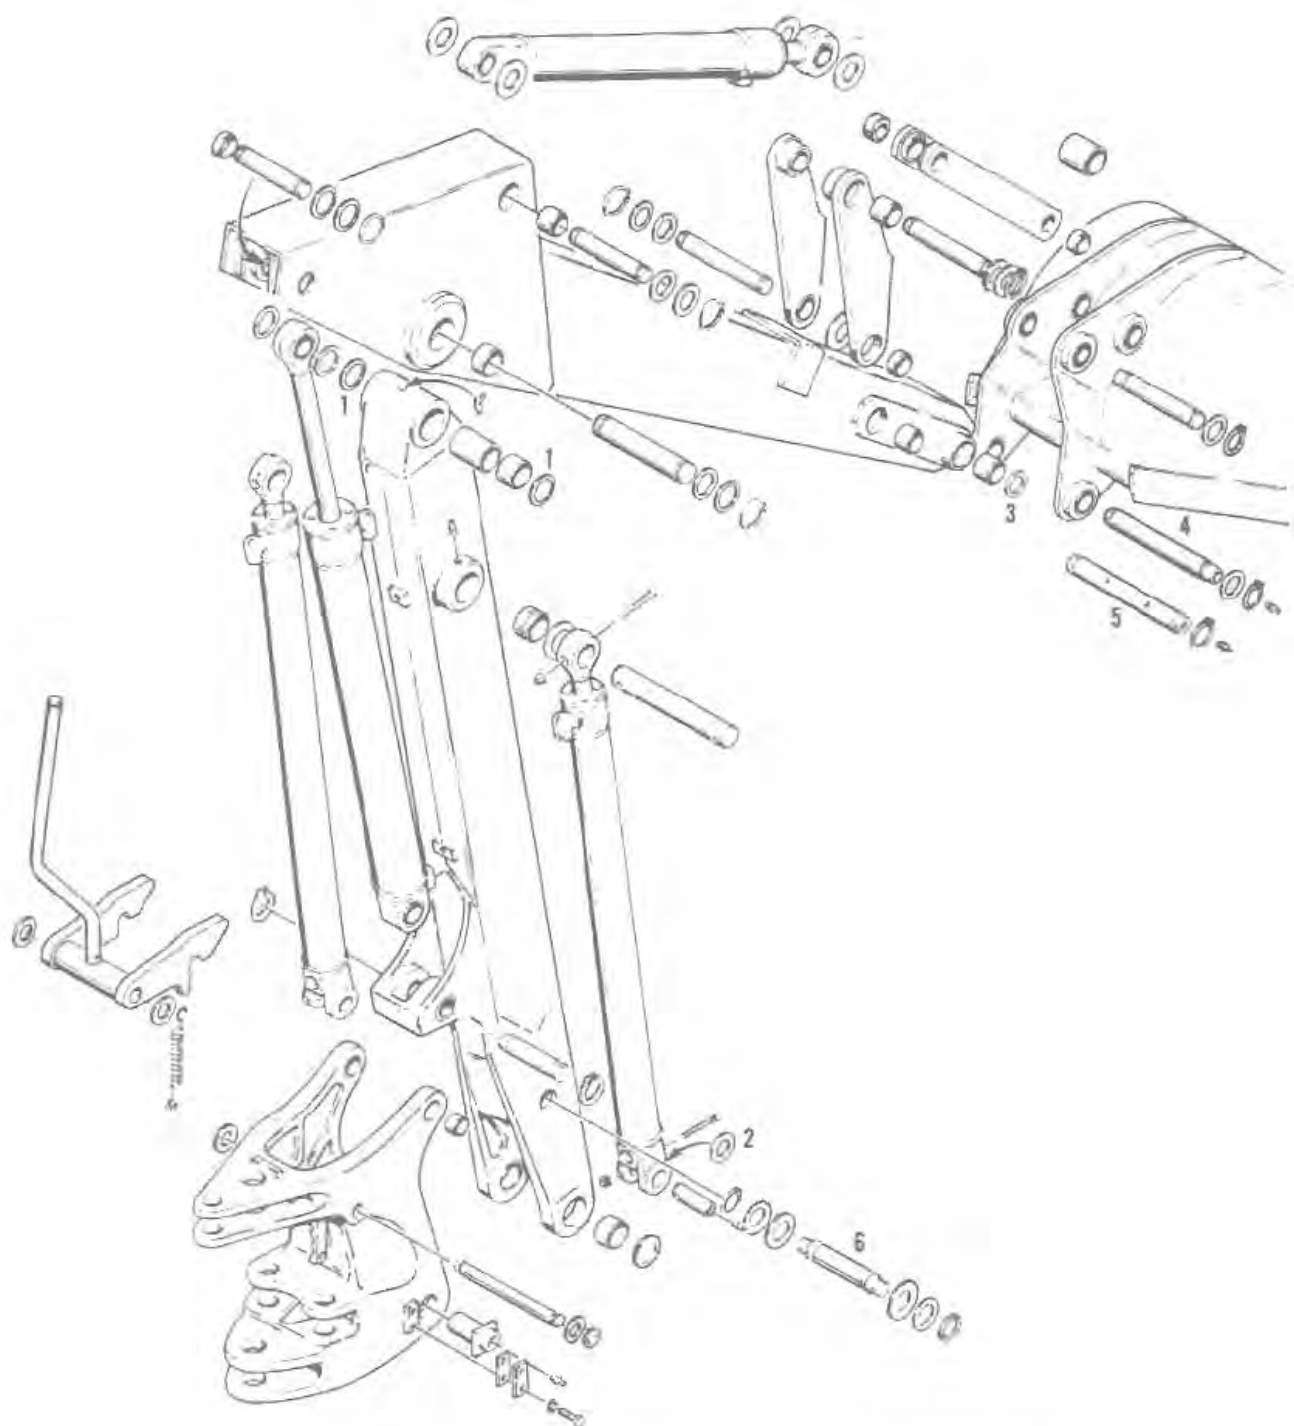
Stabilizer Cylinder Hydraulic Installation
